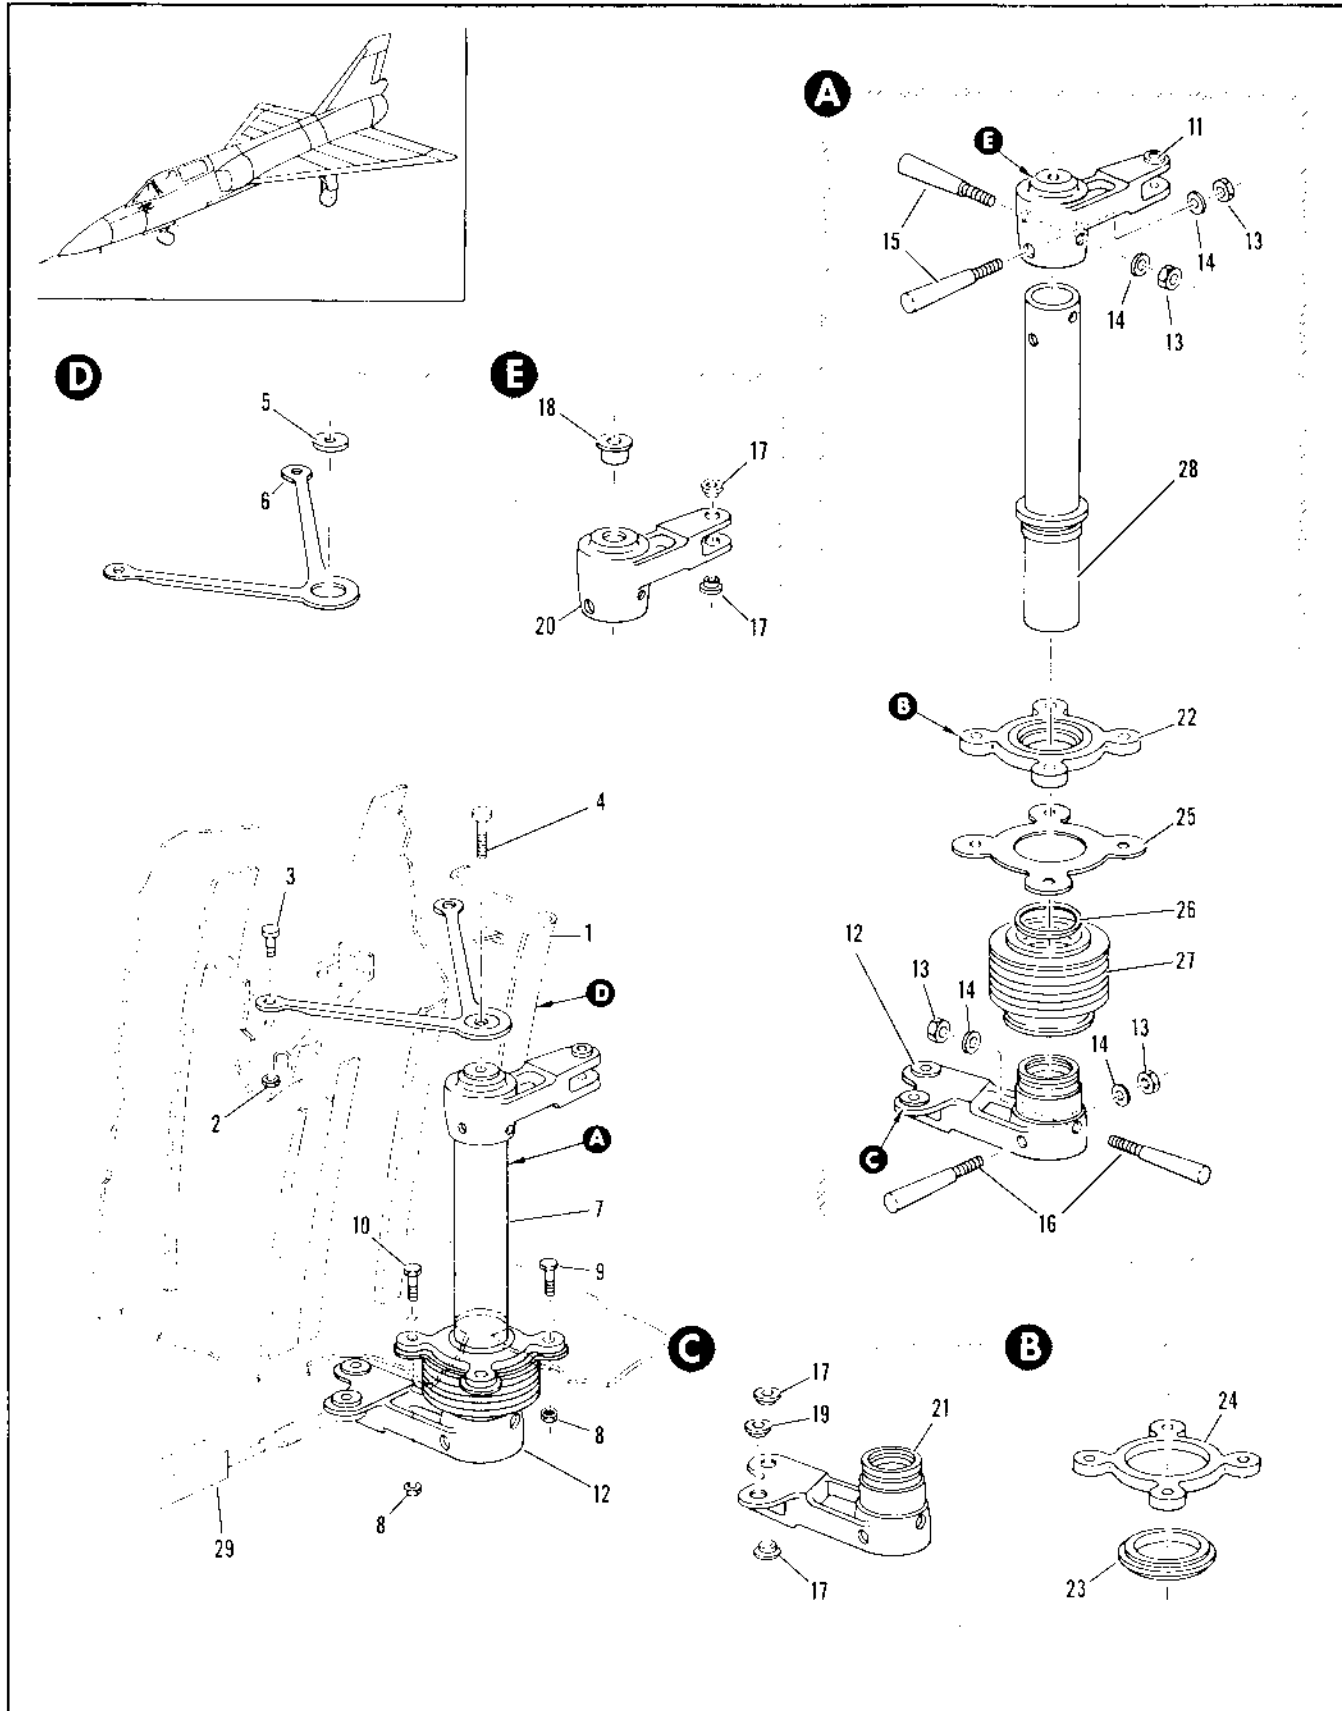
Aileron Control Bell Crank Installation Sta 142
